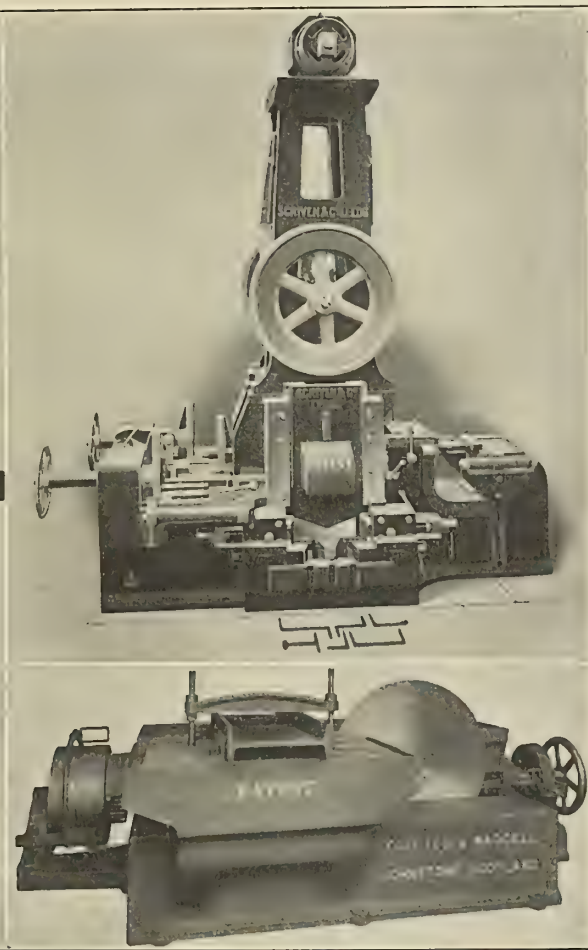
PUNCHING AND SHEARING MACHINE FOR SPECIAL SHAPES.
